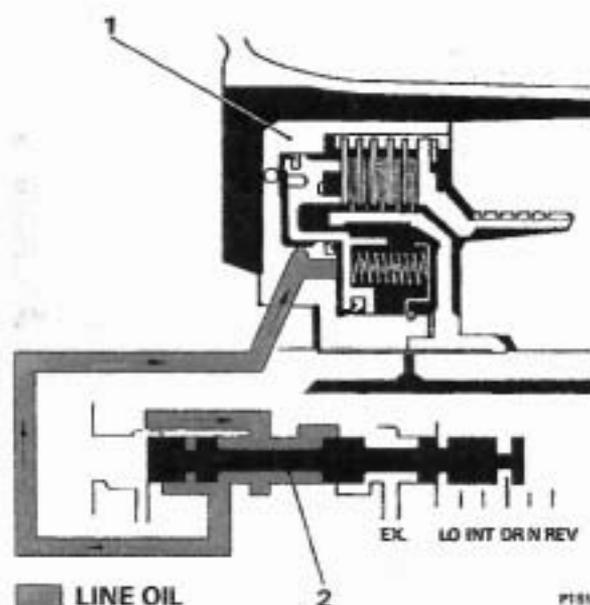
MANUAL VALVE AND FORWARD CLUTCH
